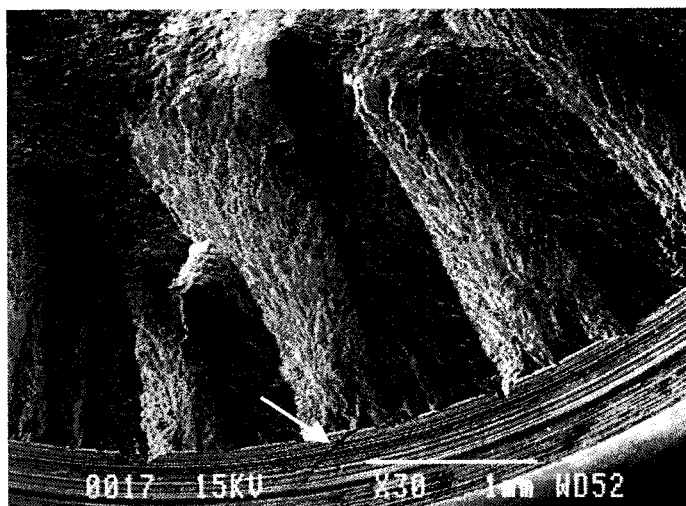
Crack coalescence observed on torsional fatigue fracture surface of specimen N2T4 (arrow showing a crack propagating on the plane perpendicular to the main crack front).
